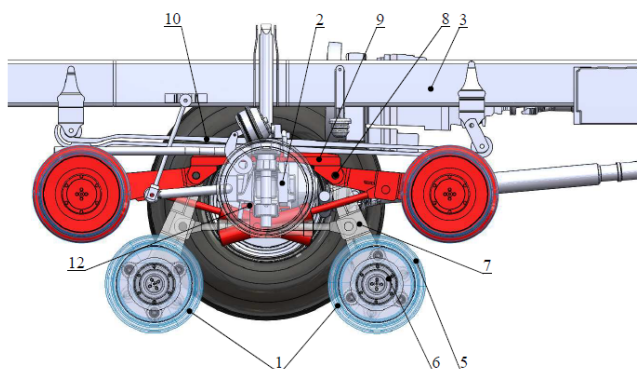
Rail running gear system with two axles (actuator is mounted under the front drive bridge) - side view
